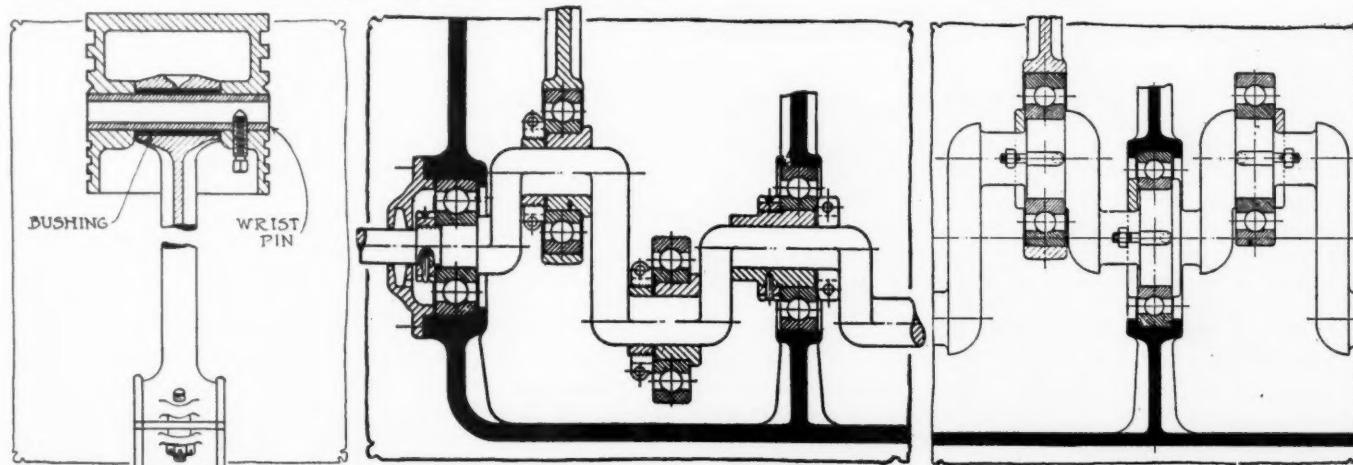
Left—Overland piston pin arrangement. Center and right—Methods of fitting the ball-bearing on a four-cylinder crankshaft
